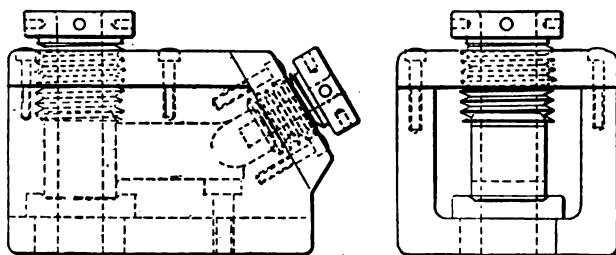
Jig for Drilling Work Shown in Fig. 59
